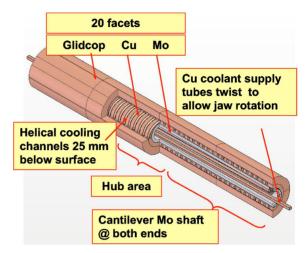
Cutaway of Jaw showing outer jaw surfaces and cooling tube routed through the center of the molybdenum shaft.
